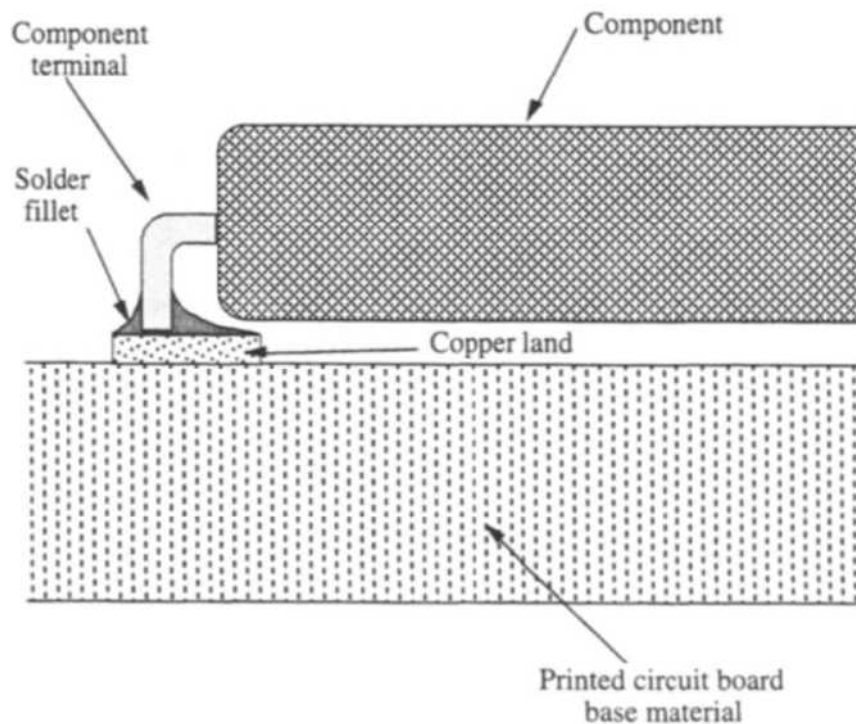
Compliant surface mount butt joint; Taken from [25], page 39
